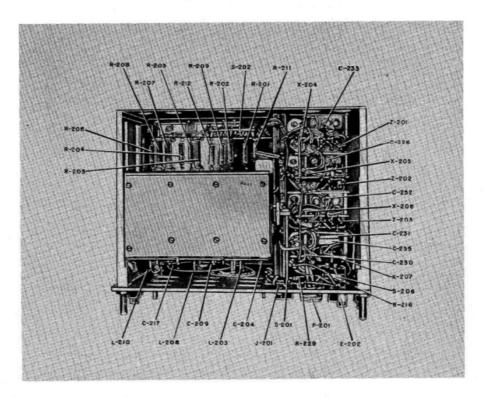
Receiver Unit — Bottom Open View (older model shown; see note for Fig. 1)
